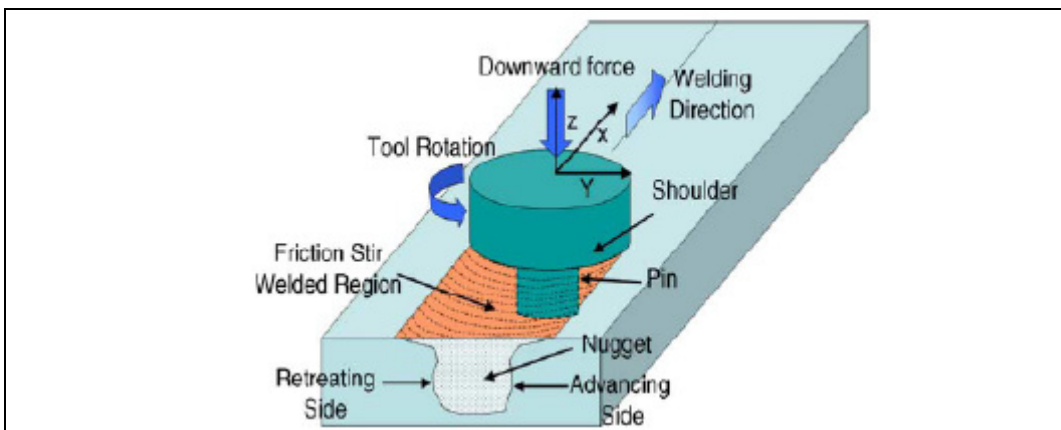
Schematic of friction stir welding process (Sattari et al., 2012)
